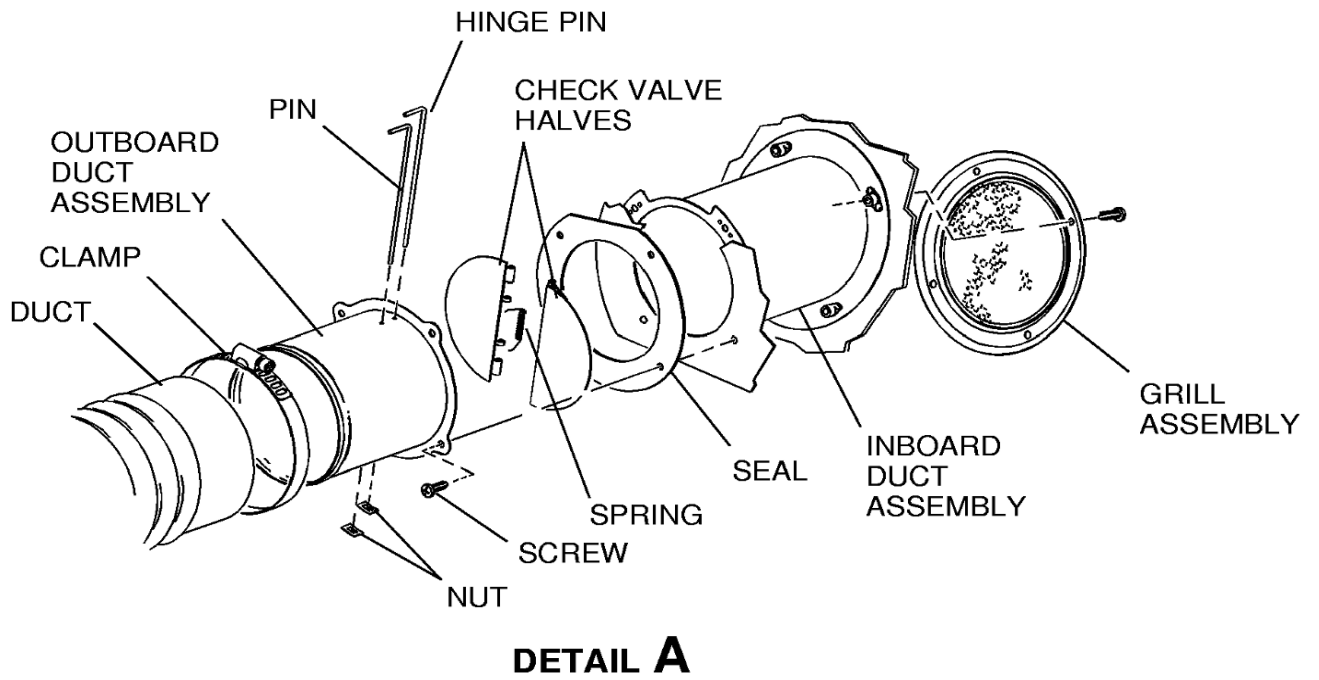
Sheet 2 : R134a Wing Mounted Return Air Check Valve Assembly
